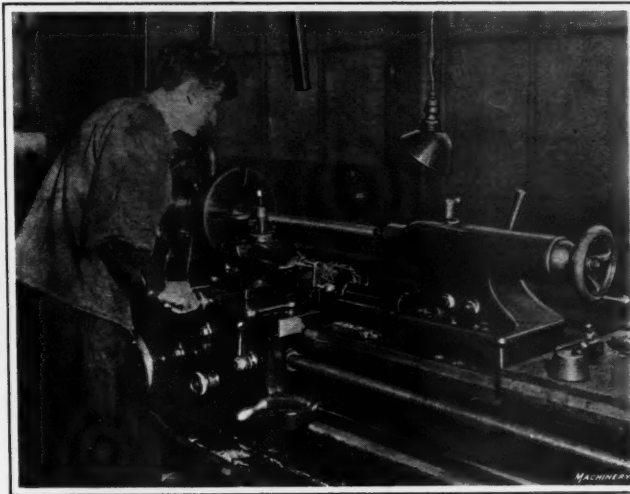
Compound Rest set Parallel to Axis of Screw for adjusting Tool when cutting Multiple Thread
